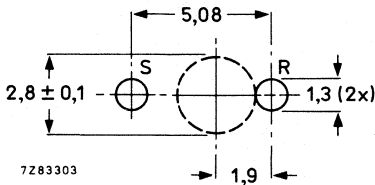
The large hole is necessary only if bottom adjustment is to be used. R = rotor, S = stator.
